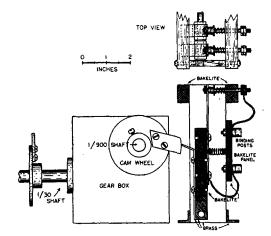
Cross section of one of the contact levers, gear box and cam wheels.
